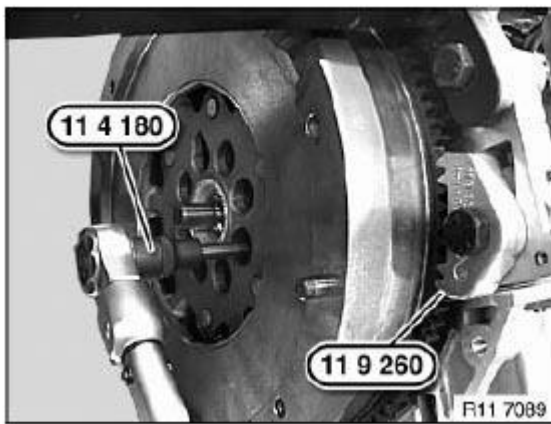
Removing Flywheel Screws Using Special Tool 11 4 180
